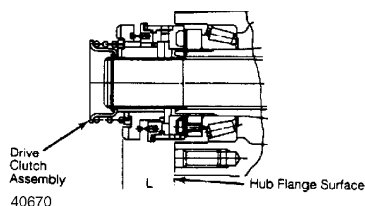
Measuring Drive Clutch-To-Hub Flange Surfaces For Spacer Installation
